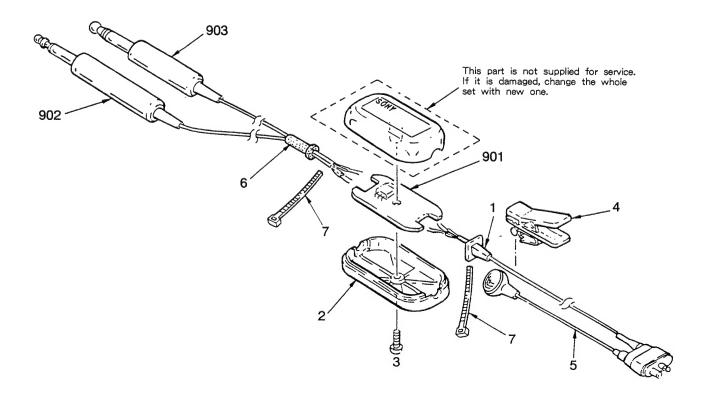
Microphone ECM-9030, ECM-9031 Exploded View
